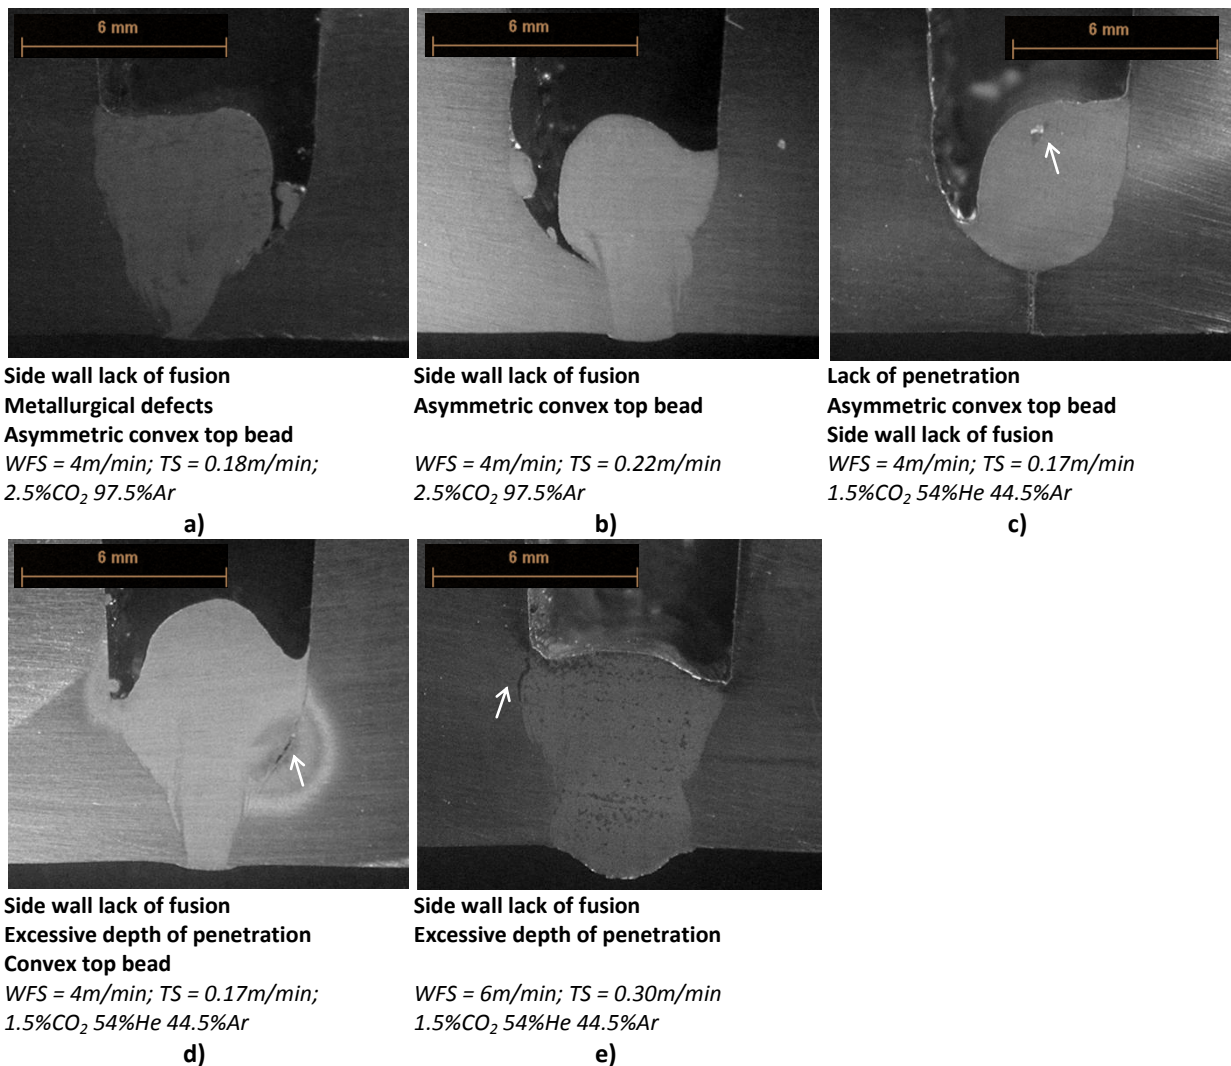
Macrostructures illustrating defects on welding of narrow groove pipe using CMT-P.
